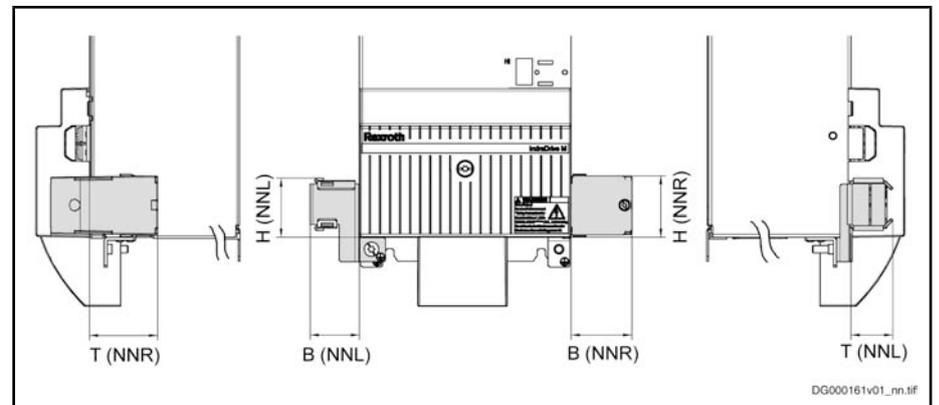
Mounting dimensions HAS05.1-004-NNR, -NNL
